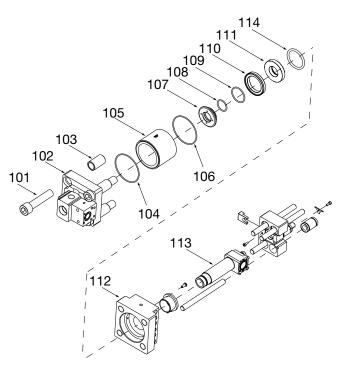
Disassemble Cylinder of 50 cc and 100 cc
